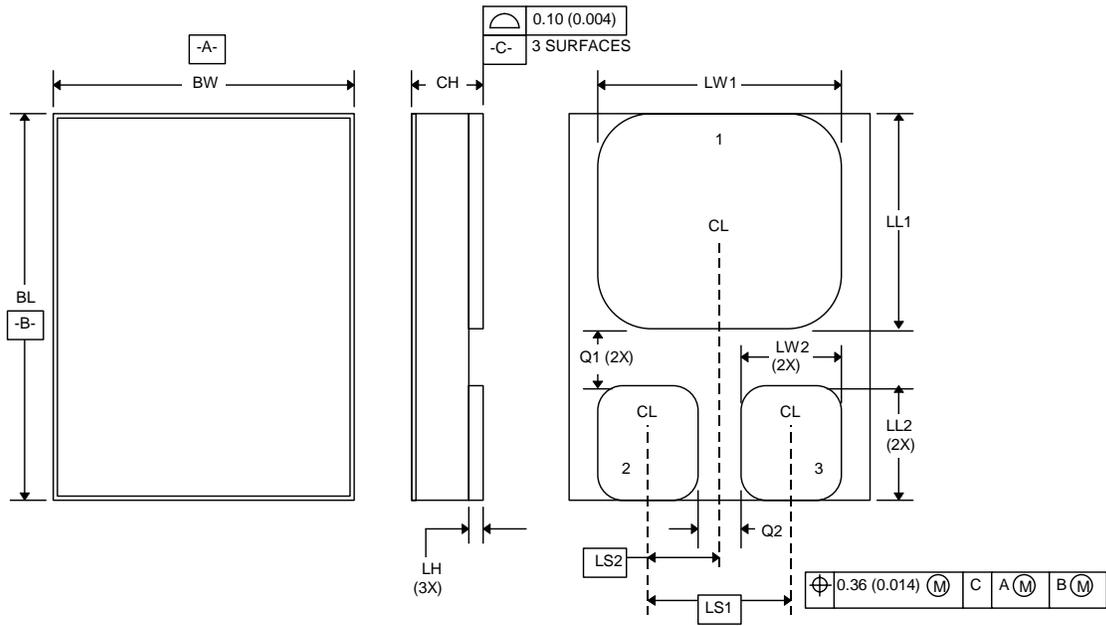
Dimensions and configuration of surface mount package outline 2N7268U, 2N7269U, 2N7270U, AND 2N7394U.
